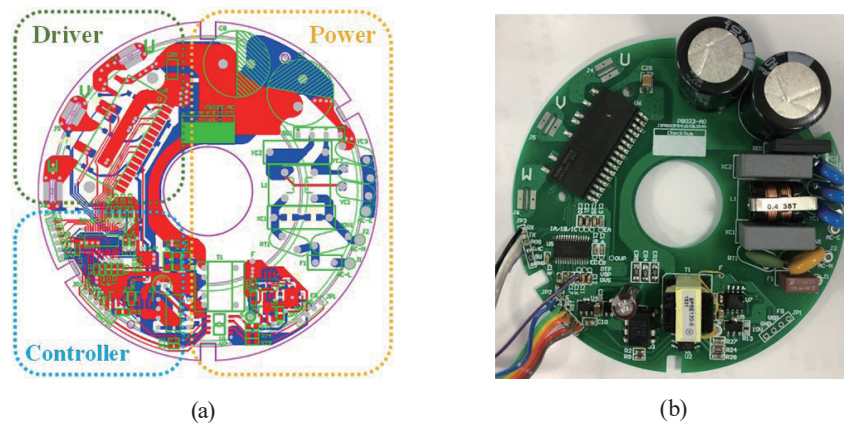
(Color online) Controller, motor drive, and power conversion circuits integrated in the EC motor: (a) overall layout and (b) PCBA.
